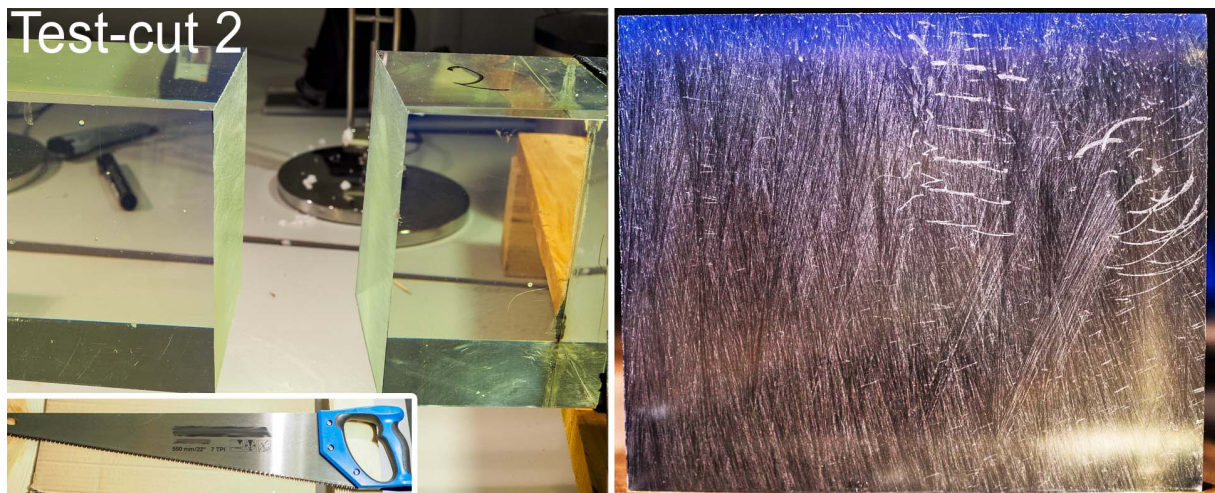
Scintillator Test-cut 2, performed using a 7 TPI handsaw. (Left panel) the cut-off piece and (right panel) a close-up of the surface finish for Test-cut 2 is shown. An image of the saw used to perform this cut is included in the bottom left panel corner.
